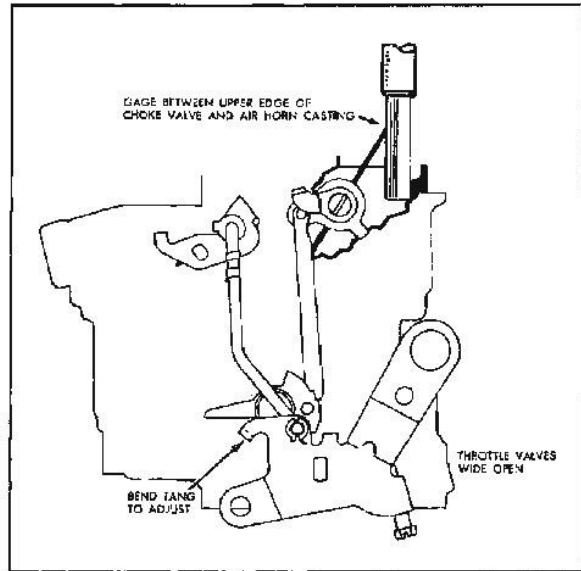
B-108 Adjust Unloader (Center Carburetor)
